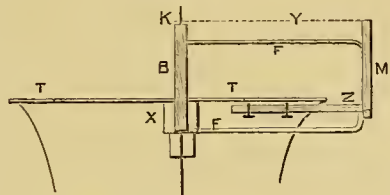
SIDE VIEW OF GUIDE FOR STEADYING SAW ARMS.
